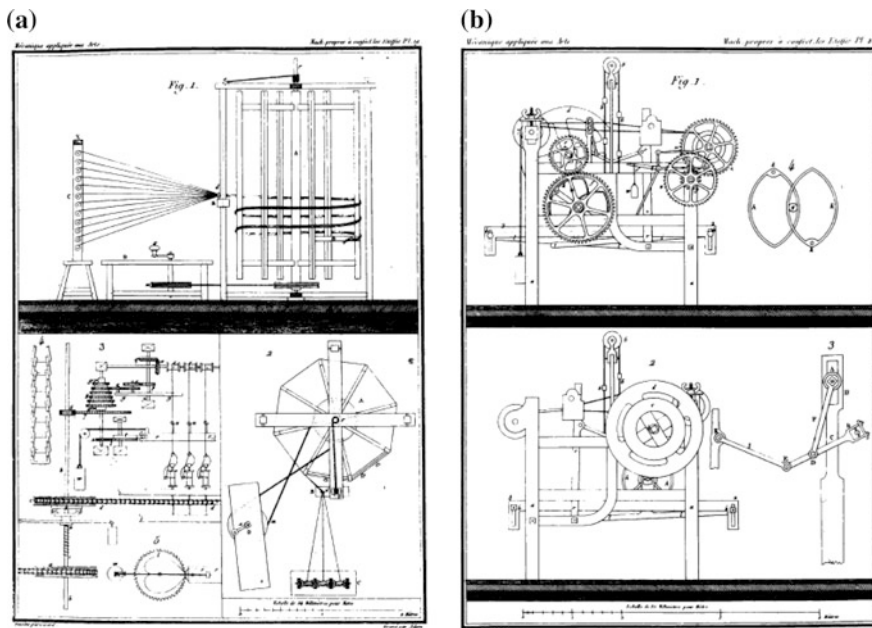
Examples of machine drawings in the book on Machines for Textile Production by Borgnis (1820a): a machines for thread composition; b mechanical loom
